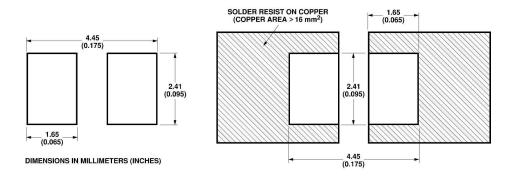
Recommended Solder Pad Dimensions and Pad Design.
